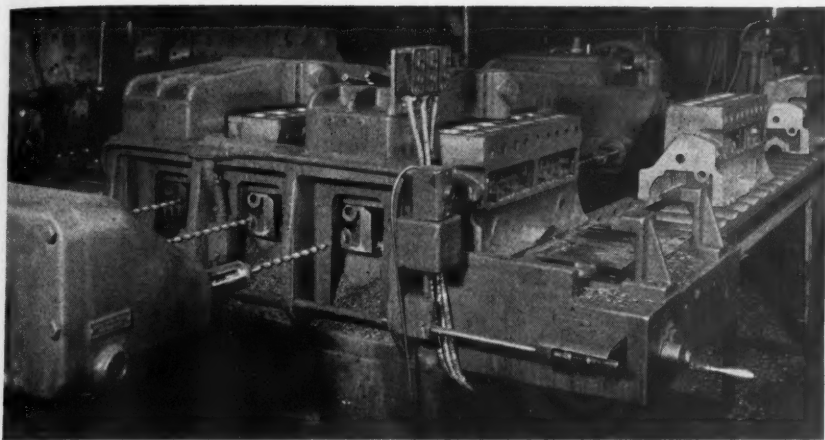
Two-way horizontal drilling machine with a progressive-type fixture for drilling the oil gallery holes. In the immediate background can be seen part of bank No. 5. Bank No. 4 is the other side of Bank No. 5, but at the time the picture was taken it contained no blocks.
